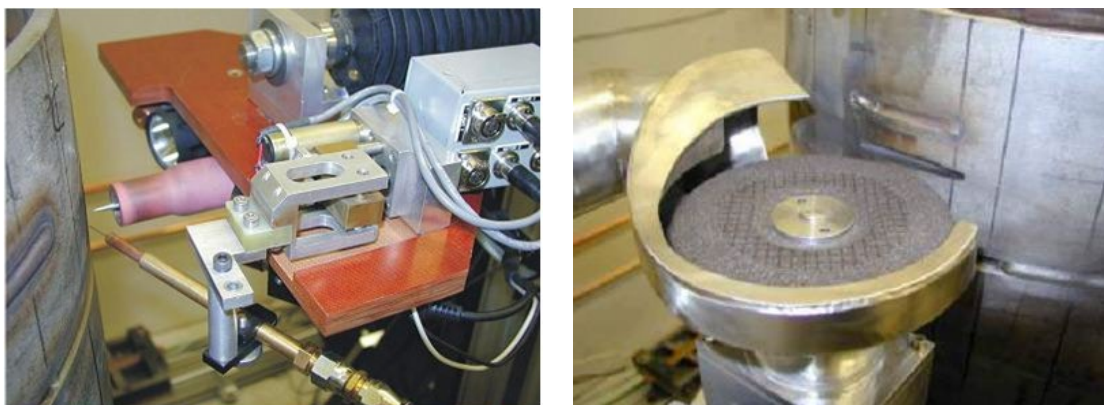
NSNFP weld head (left) and repair grinding wheel (right)⁵.
